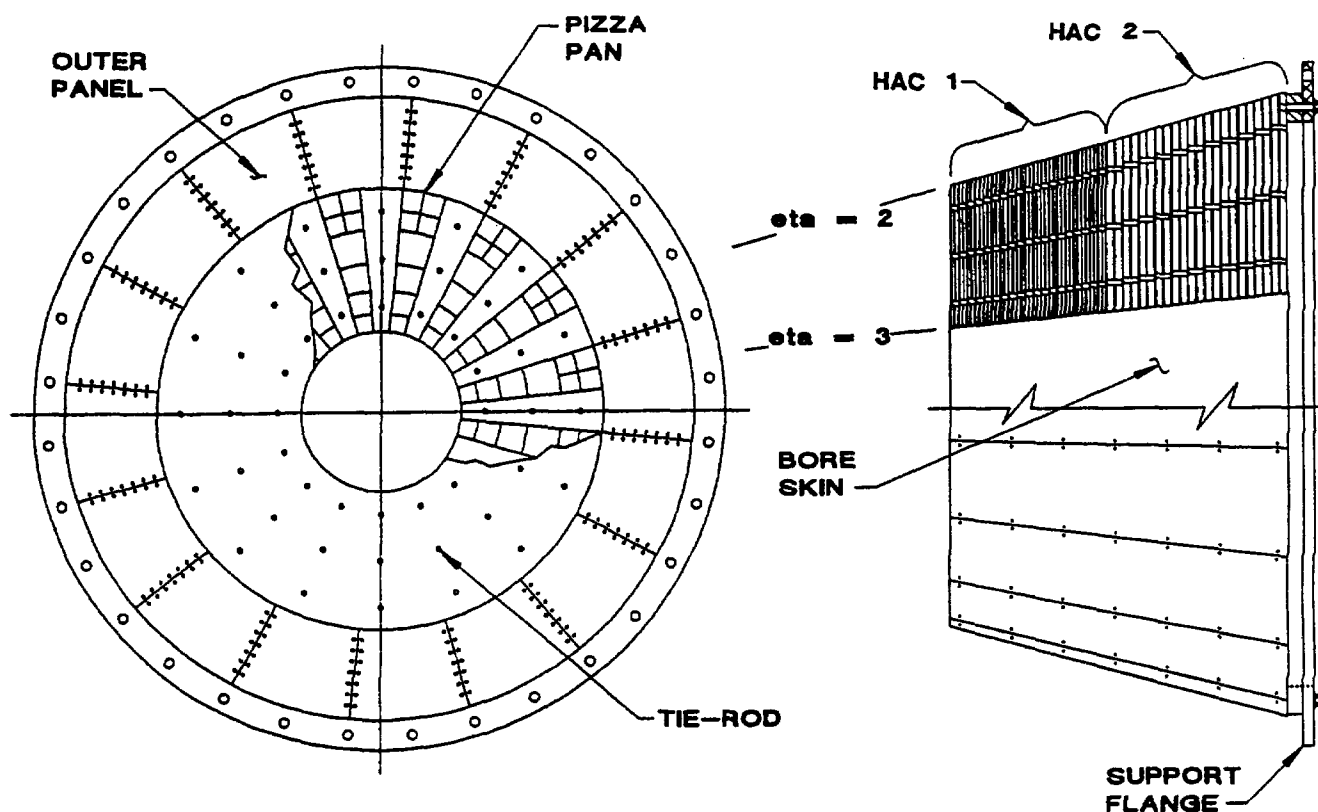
Two views of the removable hadronic plug. The structure consists of annular absorber plates and trapezoidal wedge plates connected by arrays of short tie-rods, welded to every other plate. Pizza pans containing tiles for eight towers are removed radially from absorber slots when the cantilever supported plug has been withdrawn from the endcap. Readout fibers are routed under the thin, sheet metal panels to PMTs at the back plate. Source tubes are under the bore skin. Pizza pans and tile/fiber units are installed using a "last in = first out" assembly sequence which simplifies replacement of those most subject to radiation damage.
